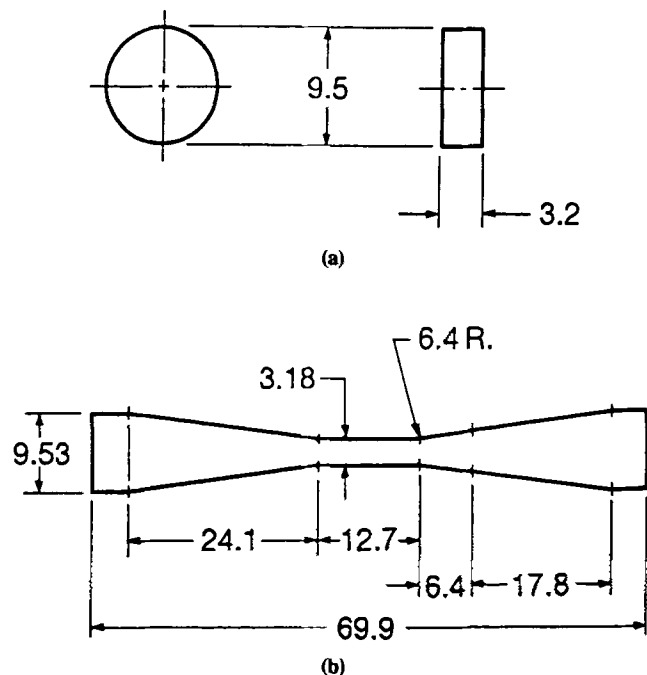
Rectangular-section tension specimens used for Phase 1 testing. (a) Wafer specimen. Wafer is tested in compression on a diametral axis but produces tension on the section perpendicular to the compression axis. (b) Bowtie specimen. Dimensions are given in millimeters.
